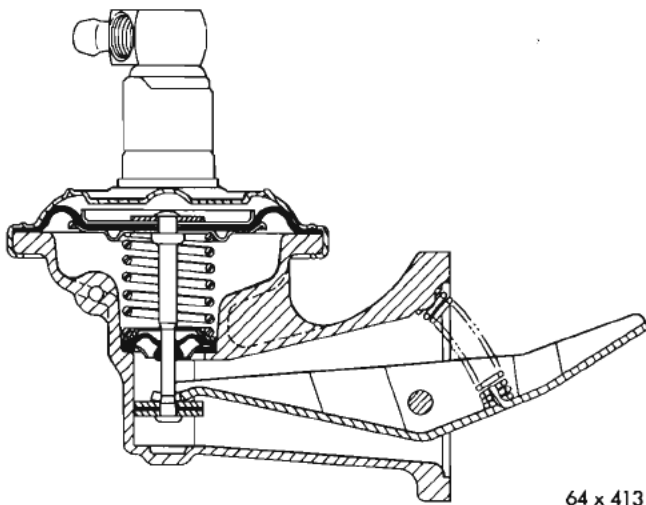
Fuel Pump Assembly (170-225 Cu. In. Engine)
